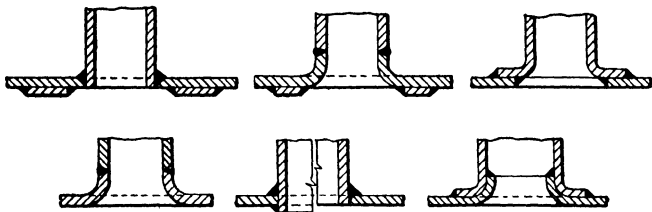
These (and many other) methods of welding nozzle connections to boiler drums are acceptable if they meet dimensional and other requirements of the boiler code.
